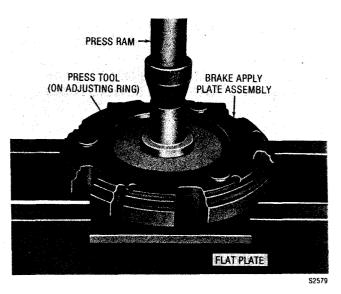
Pressing brake adjusting ring flush with apply-plate surface (TTB)
